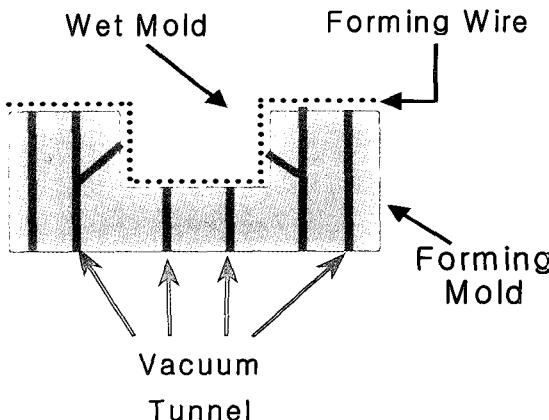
The schematic diagram of forming mold and contamination at the forming mold and wire.
